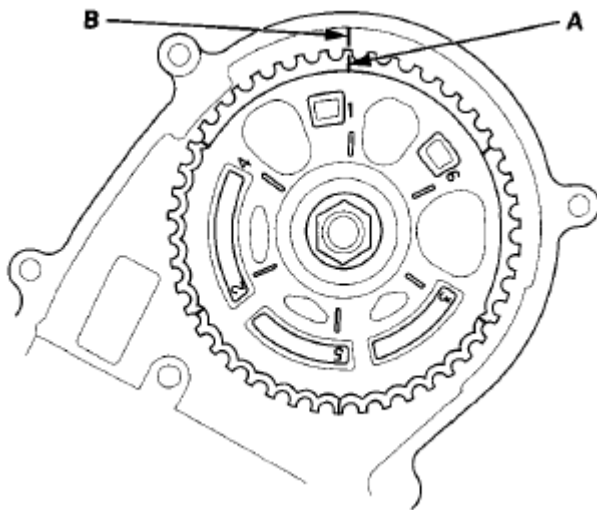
Identifying TDC Marks And Pointers On Camshaft Pulley - Front
